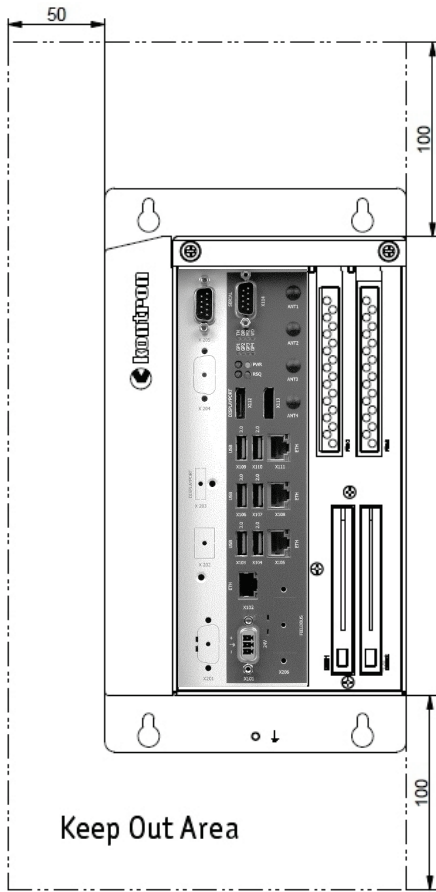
Keep out area for mounting around KBox C-104-TGL-2 (front side view with optional fan tray)
